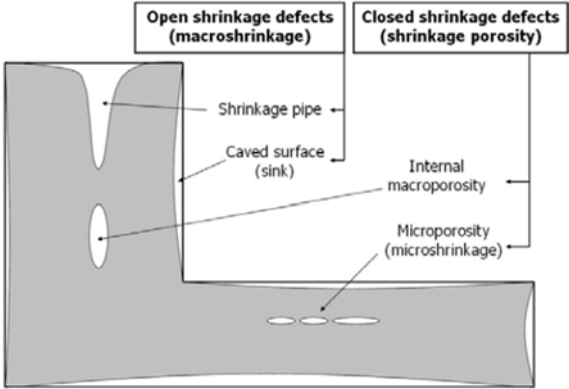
macroshrinkage and shrinkage porosity in gravity die casting example
